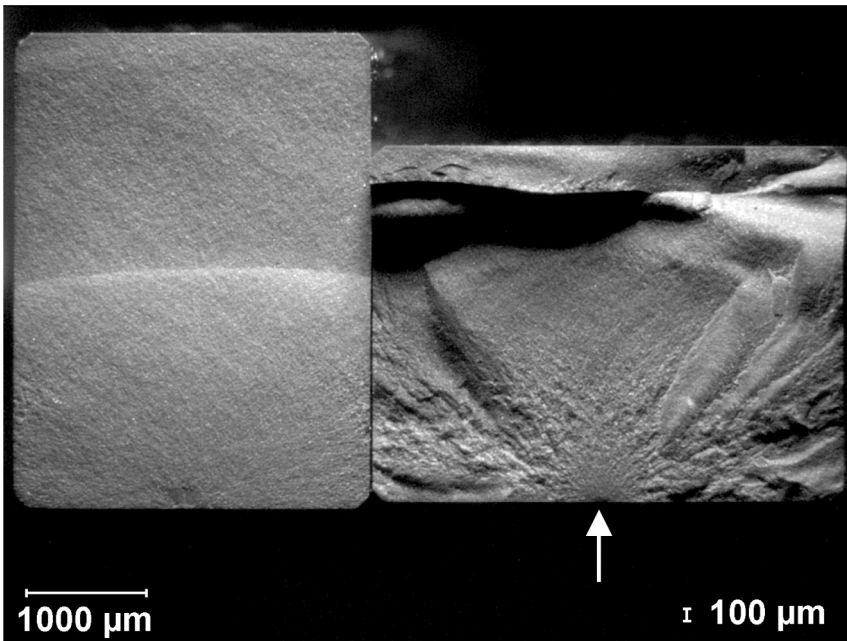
Matching fracture surfaces for a single SRM 2100 test specimen. The specimen was first tested by the SCF method and produced the fracture surface on the right. It is common to put the semielliptical surface flaw into the wider face. The precrack is just barely visible (arrow) at this magnification within the fracture mirror. This fracture surface has all the normal characteristics of a strength test fracture surface. One half of the broken specimen was retested in the SEPB configuration as shown on the left. The precrack extends half way into the test piece. The lower fracture load for the SEPB configuration creates a much smoother fracture surface.
